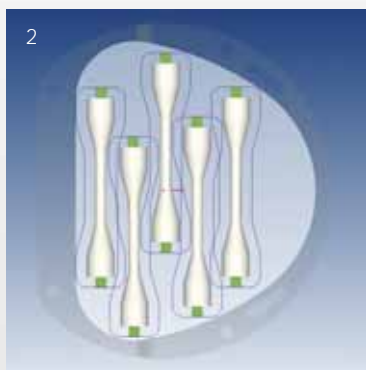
Using this dataset test pieces were milled from wax and Ceramill Sintron for the tensile test
